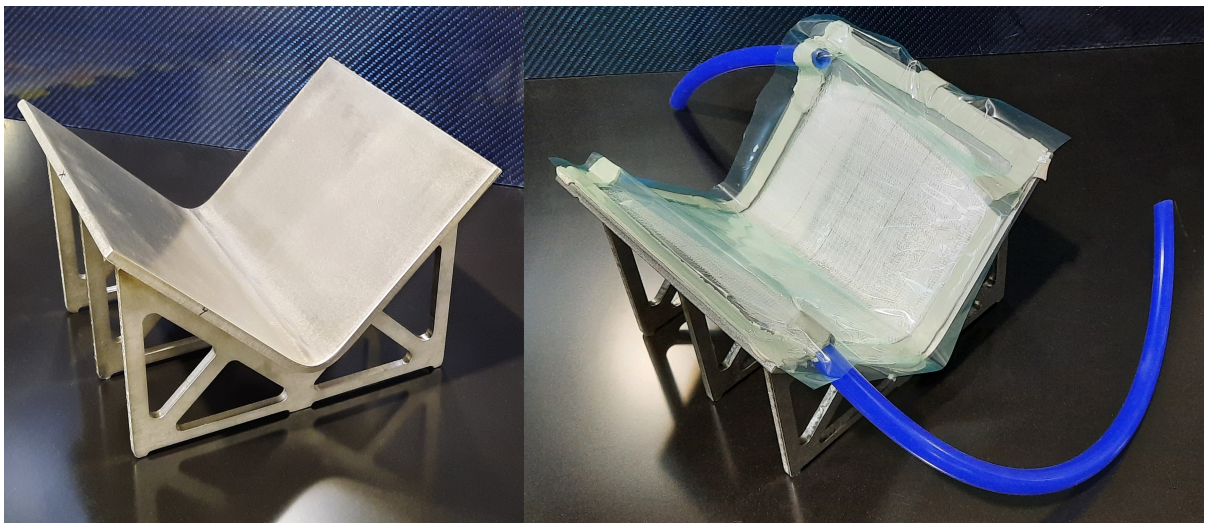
The steel L-shape mould used to manufacture the composite specimens before (left) and after the bagging process has been completed (right).
